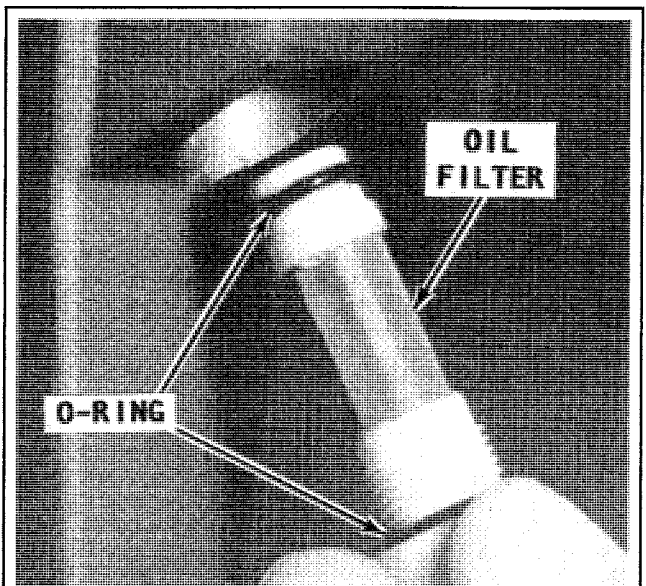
the filter is threaded into position and seals with O-rings on either end
